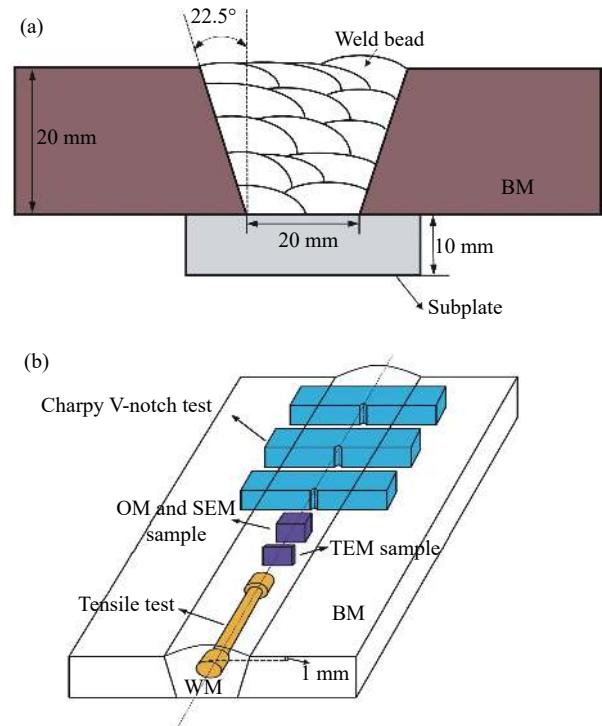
(a) Weld groove size and multi-pass welding schematic diagram; (b) positions of specimens in the weld metal for microstructure analysis and mechanical tests.
